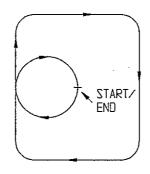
Inside CW Finish Rectangular X≤Y P151≤P152
